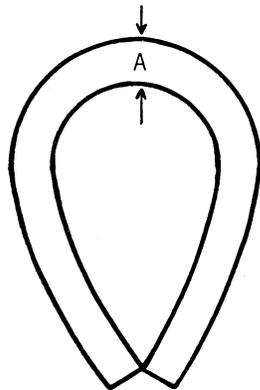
BEND TEST OF VACUUM BRAKE HOSE.
